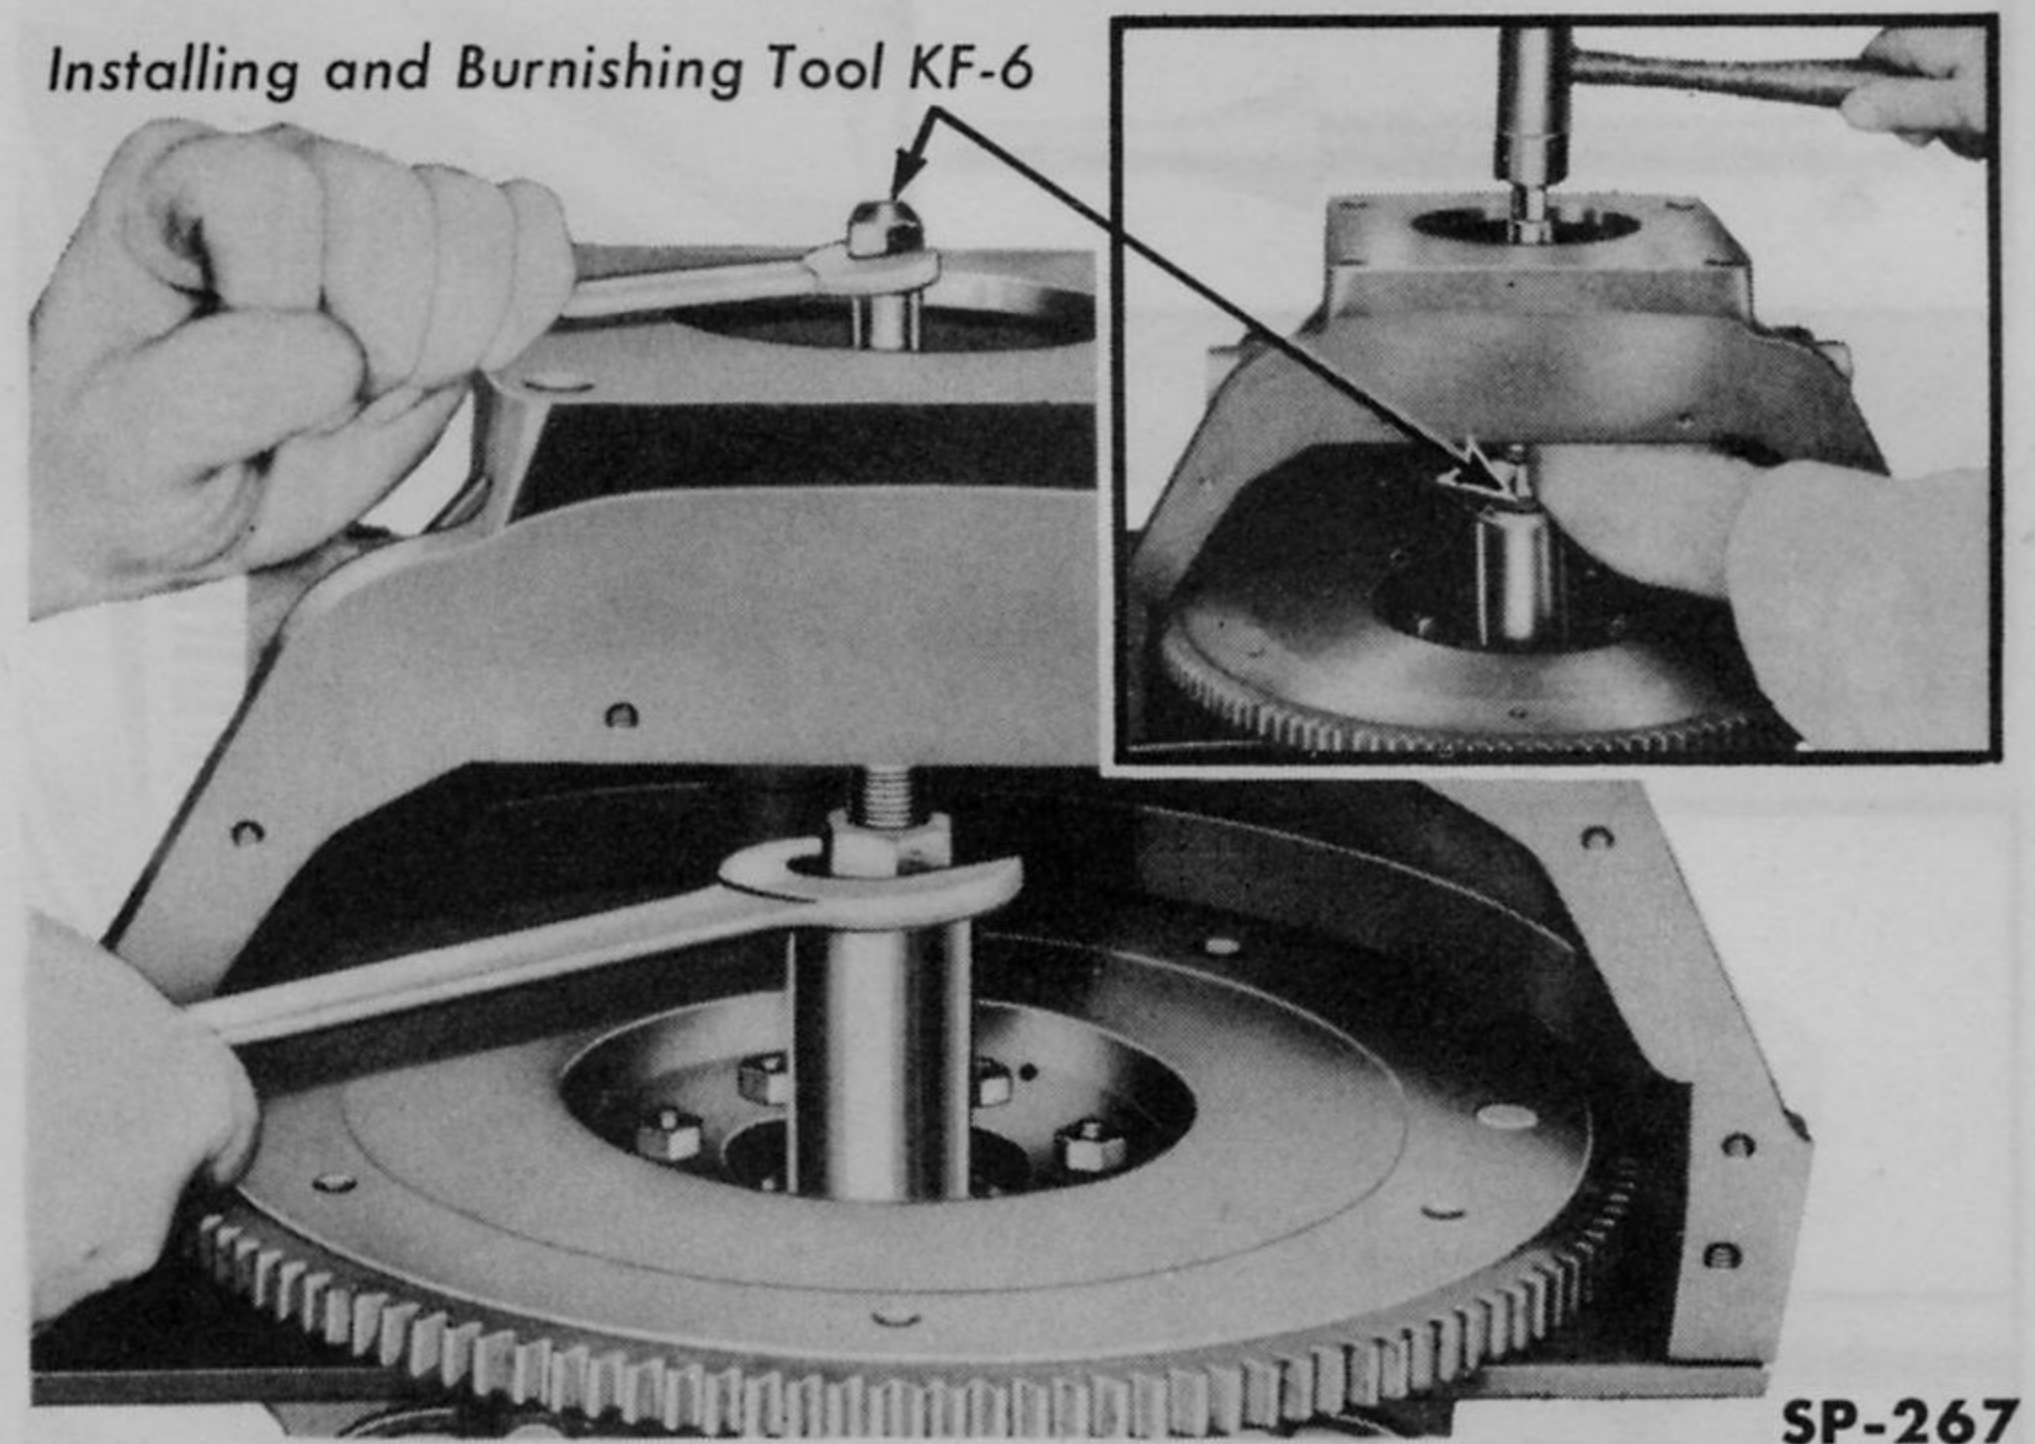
Installing And Burnishing Crankshaft Pilot Bushing
